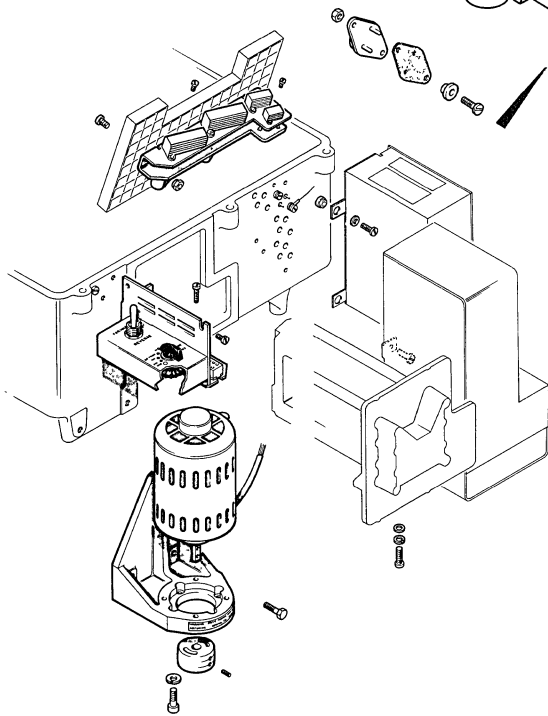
5444 DISK FILE, FINAL ASSEMBLY (PART 2 OF 4)
